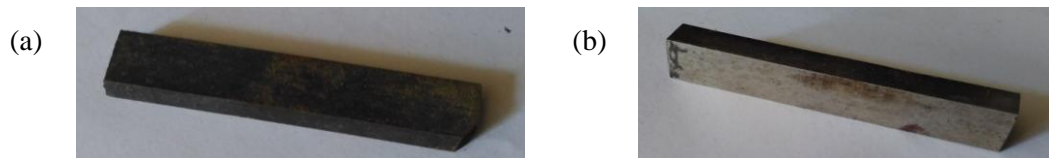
Photographs of the workpiece after (a) heat treatment and (b) grinding
